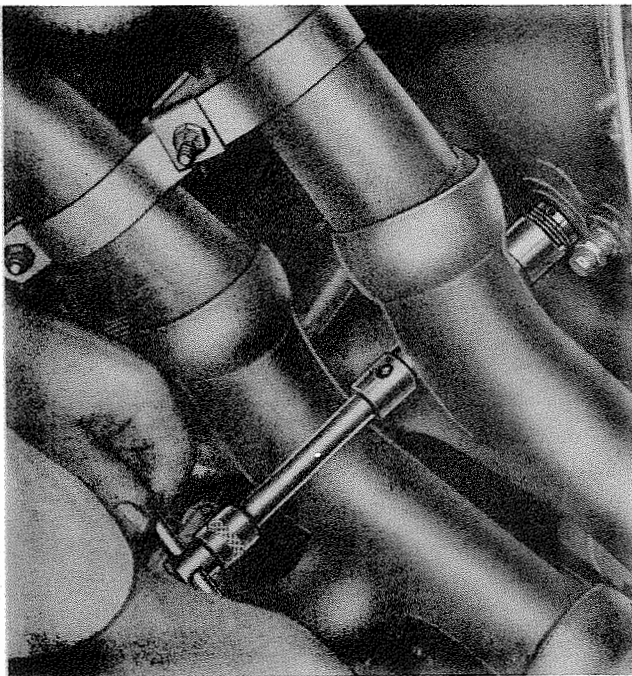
Loosening PRT Oil Pressure Control Valve Assembly
